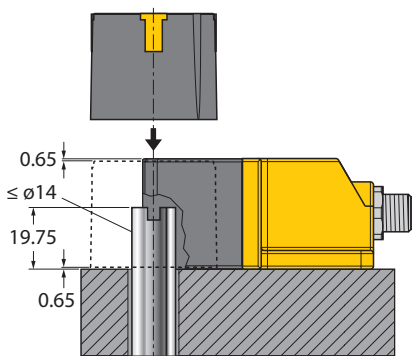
Mounting the sensor — shaft diameter of up to 14 mm
